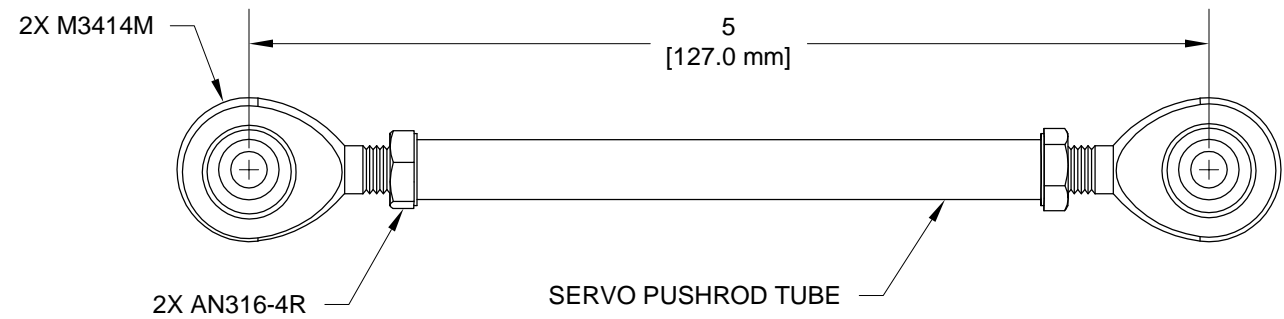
ROLL SERVO PUSHROD ASSEMBLY
